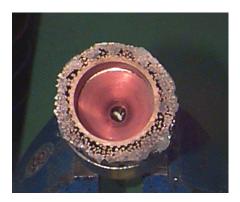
Cross-section of the joint soldered with heat blower without mold
